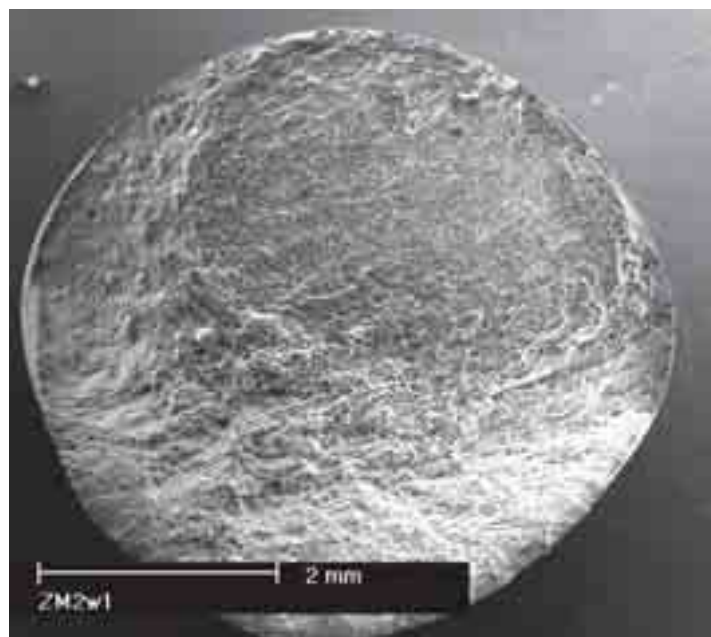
Surface of fatigue crack. 5059 alloy welded with GMA method
